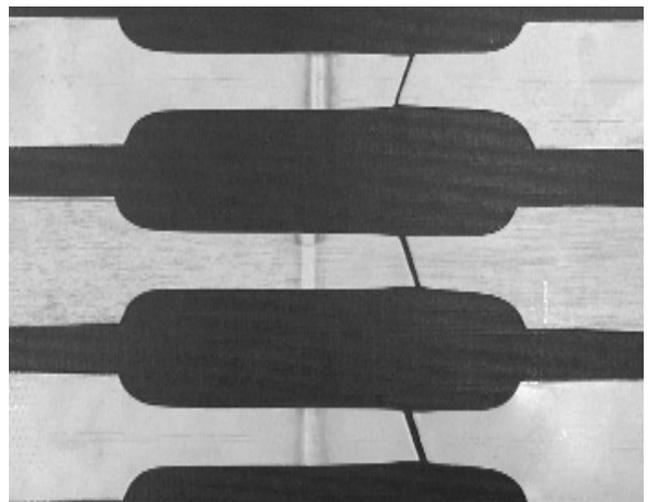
A view of butt joints of austenitic steel AISI 321 sheets 1,0 [mm] thick welded by the high power diode laser HPDL ROFIN DL 020 after static tensile test. Broken in base material
